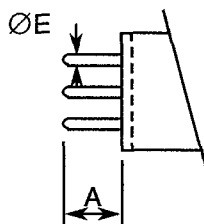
PHYSICAL DIMENSIONS(CONTINUED)
